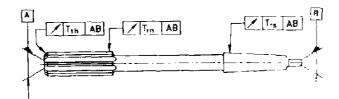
RUN OUT TOLERANCES FOR REAMERS WITH MORSE PAPER SHANK
